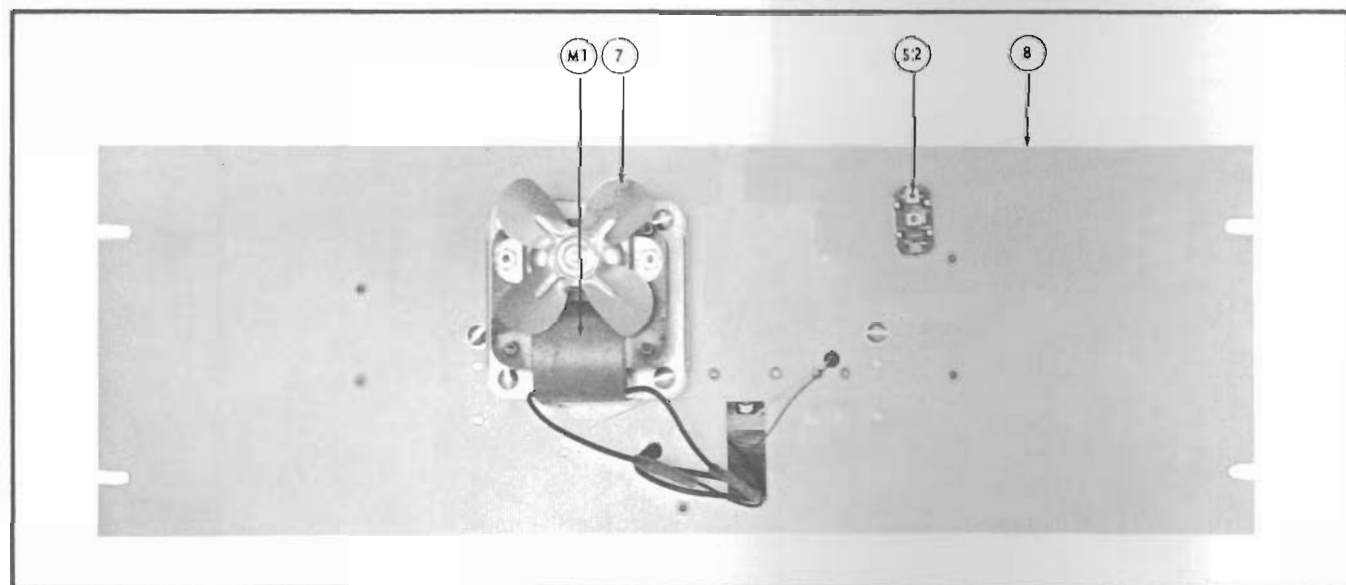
Rear View of Transport Showing Location of Various Electronic and Mechanical Parts
